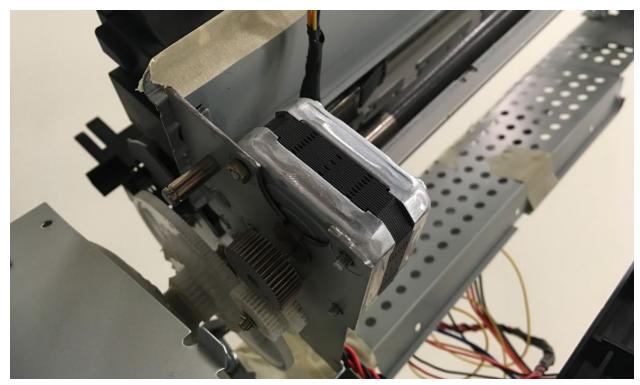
Arm rotation mechanism. This used the paper-feed motor and gear train to pivot the cantilevered gripper between the tower and the stretcher.
